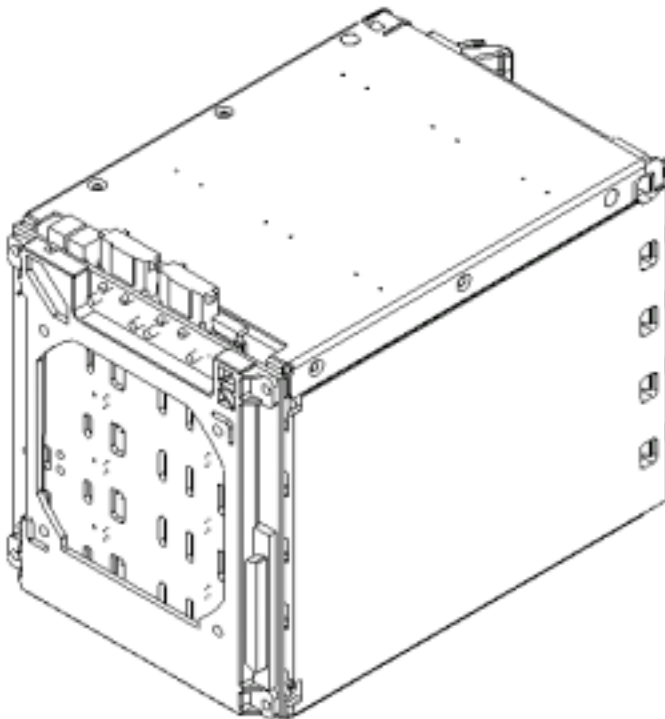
Hot-swap Drive Bay, Rear Isometric View
